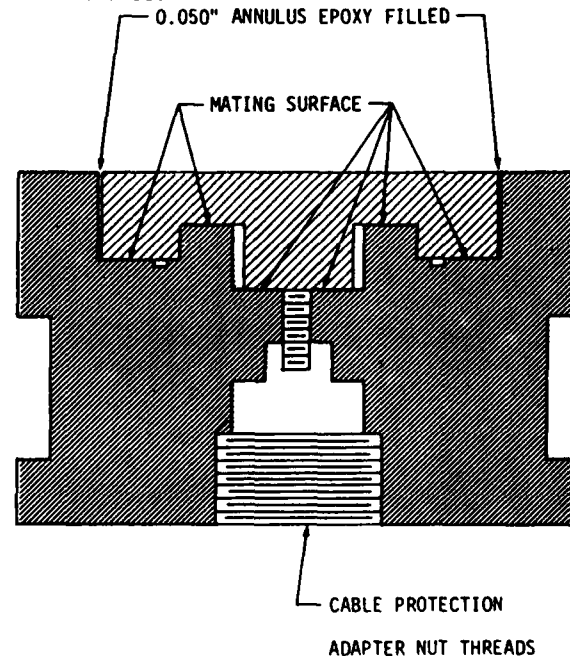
Schematic cross-section of WES Column Based Airblast (CBA) Gage
